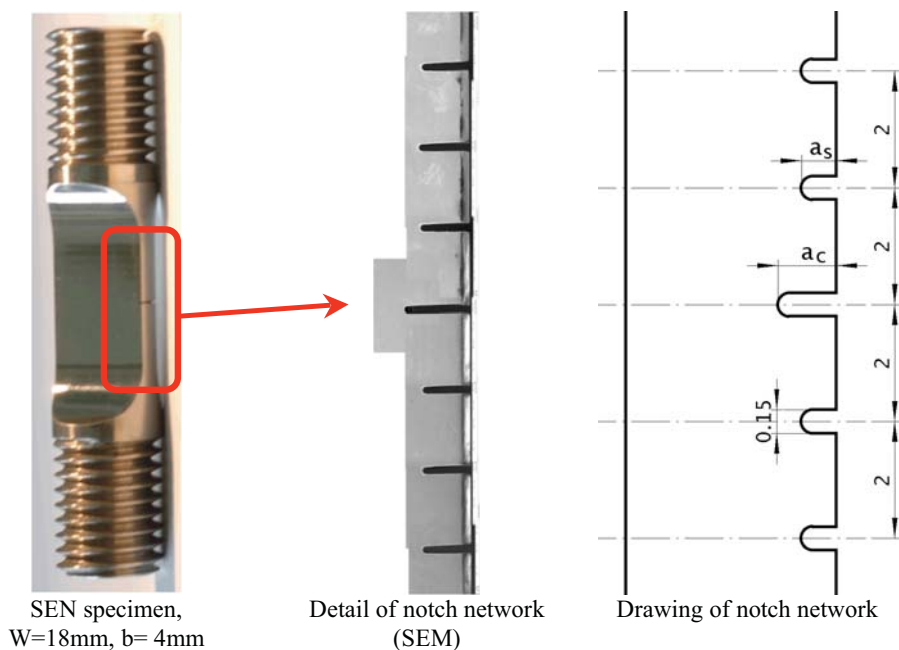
Specimen used for testing a parallel crack array: general view, detailed view of a notch network, sketch of crack array (all dimensions in mm).
